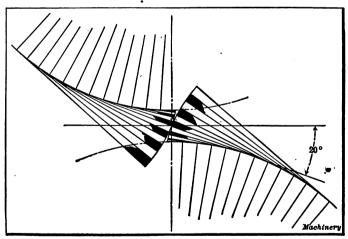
Analyzing the Tooth Contact of the Stub-tooth Gears in Fig. 3
